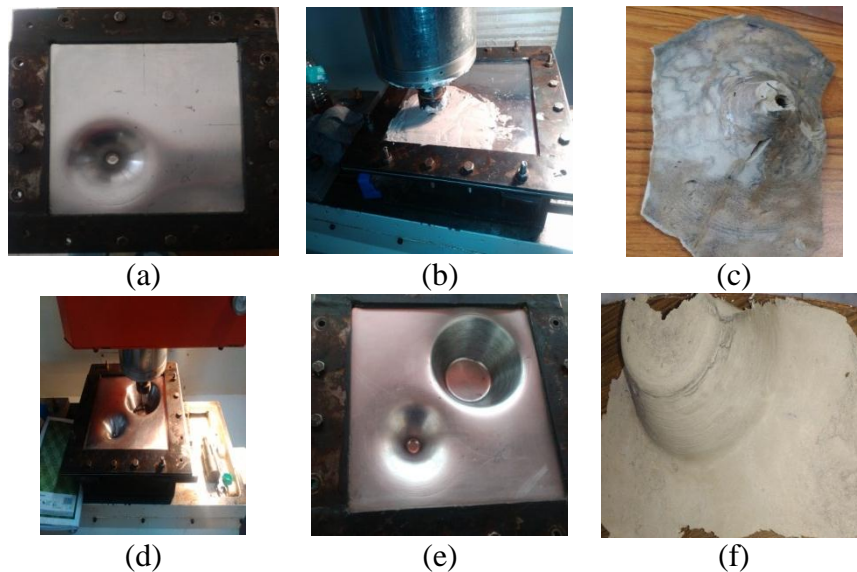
Process chain for making whole sheet (a) sheet after forming funnel, (b) POP casting of funnel, (c) casted POP for measuring, (d) forming of cone, (e) sheet after forming cone and (f) POP casting of cone
